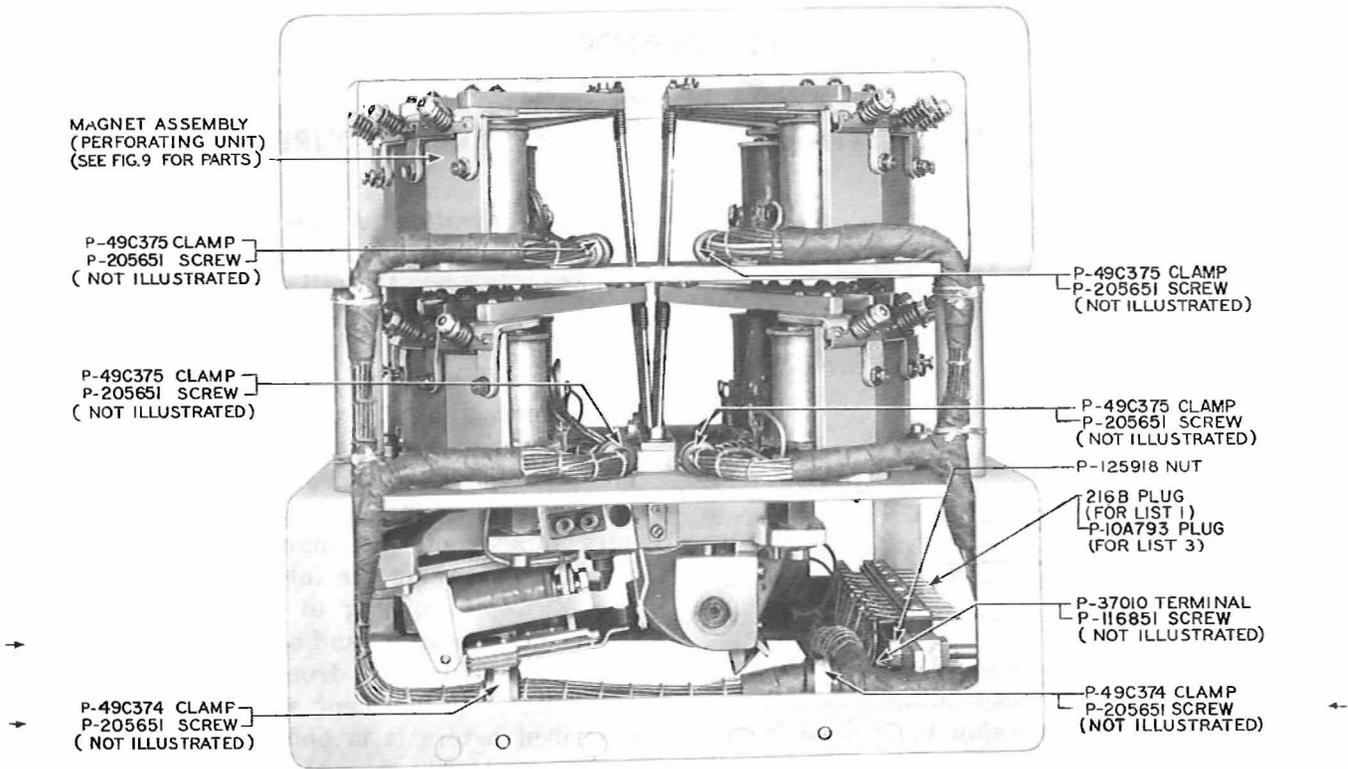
KS-13882 L1 and L3 Perforators — Stepper Assembly Side
